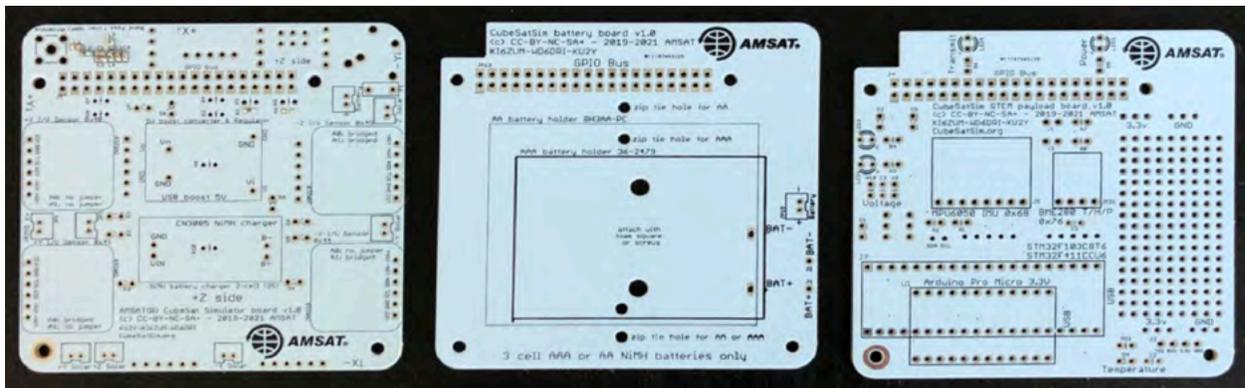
Three blank PCB boards with SMD (Surface Mount Devices) already installed, available at the AMSAT Store.
